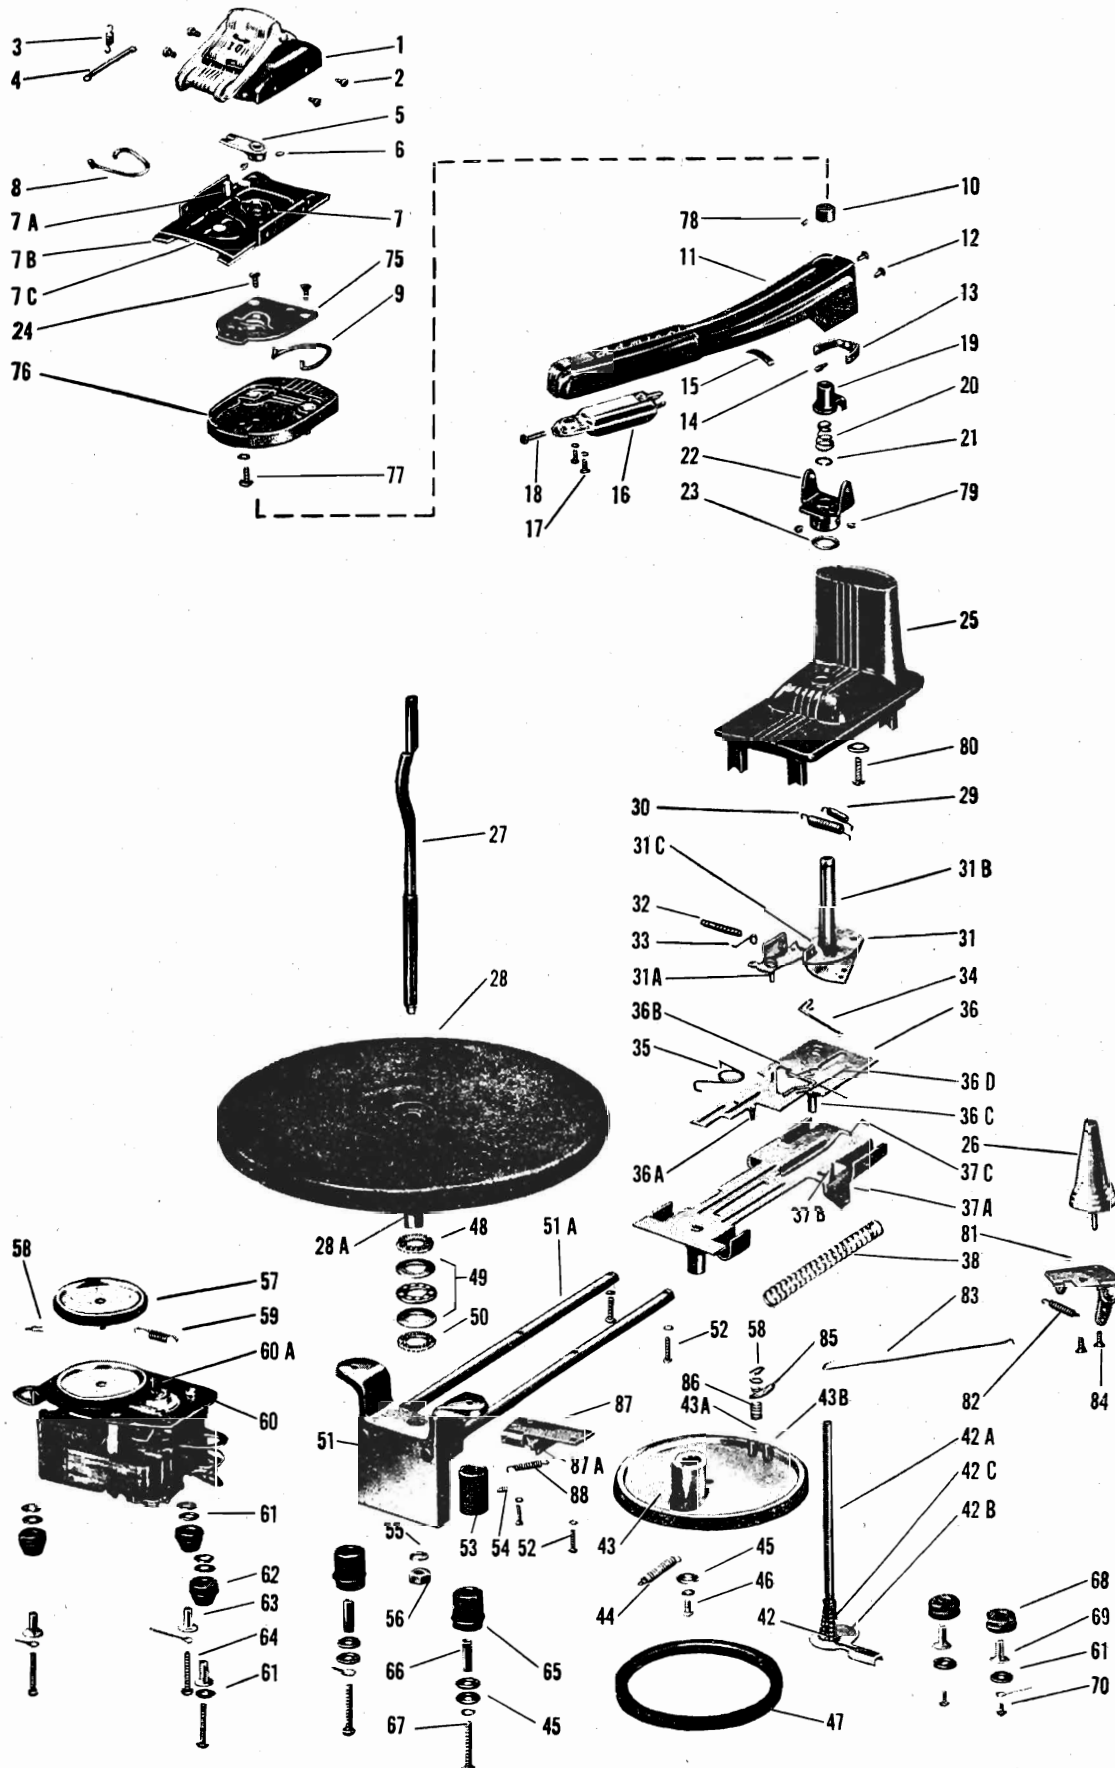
RECORD CHANGER, EXPLODED VIEW
